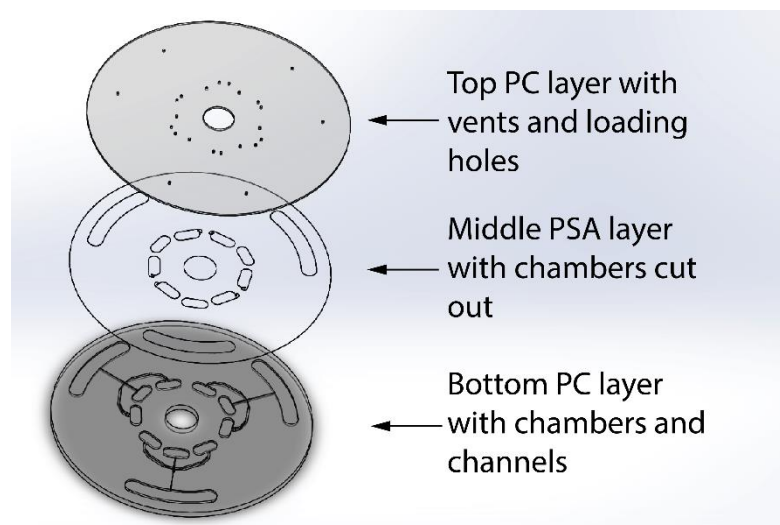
Exploded view of a three-layer microfluidic CD. The top layer is 1mm thick PC with vent and loading holes drilled into it. The middle layer is the adhesive with the chambers and center hole cut out. The bottom layer is a thicker 3mm PC with channels and chambers milled into it.
